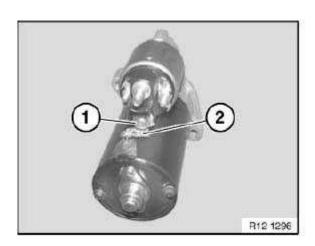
Identifying Starter Motor Cable Lug And Nut Courtesy of BMW OF NORTH AMERICA, INC.
